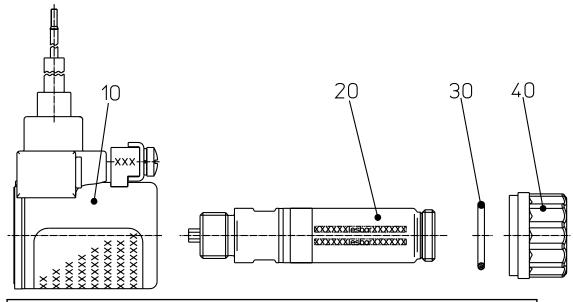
Fastening nut 472793 Suitable socket wrench SW26 (bihex DIN 3124) O-ring to be used: 19 x 2.5 70 shore A Tightening torque 5 ⁺¹ Nm
